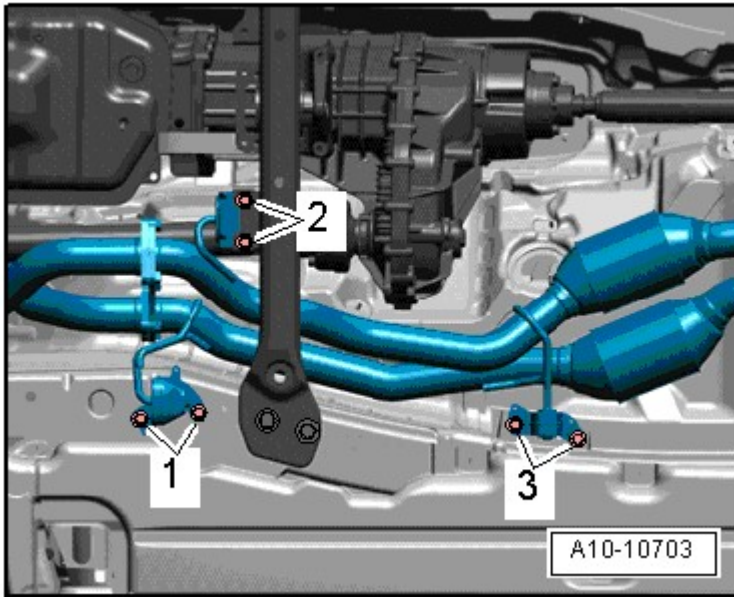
Identifying Bolts -1, 2, 3- On Main Catalytic Converter Brackets
